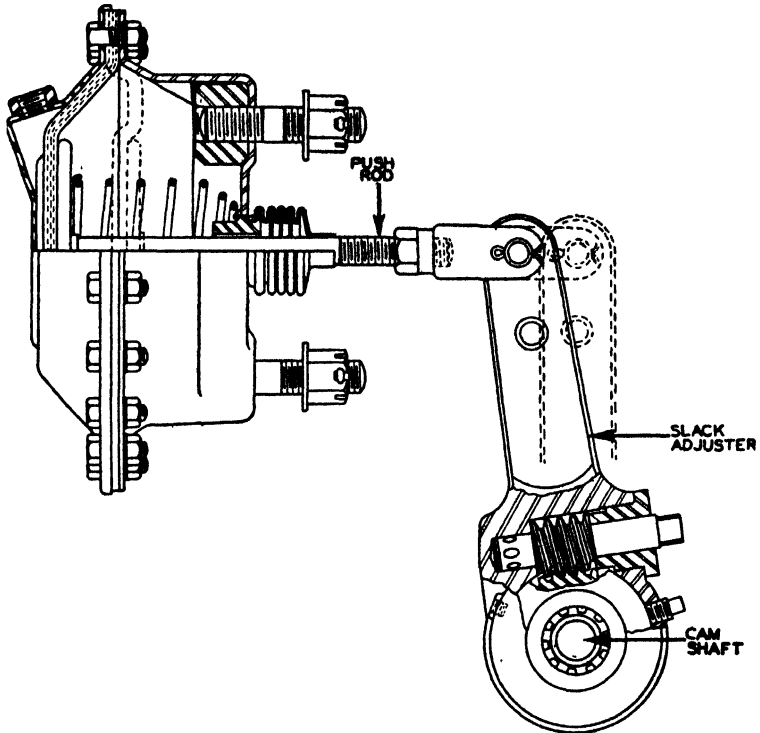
BRAKE CHAMBER AND "SLACK-ADJUSTER."
